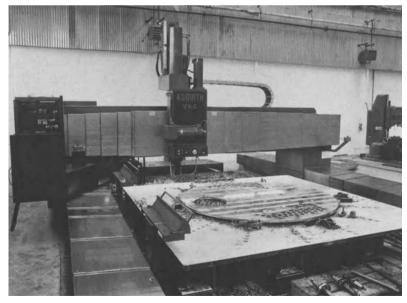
A moving gantry vertical milling machine. [Courtesy of Asquith 81.]
